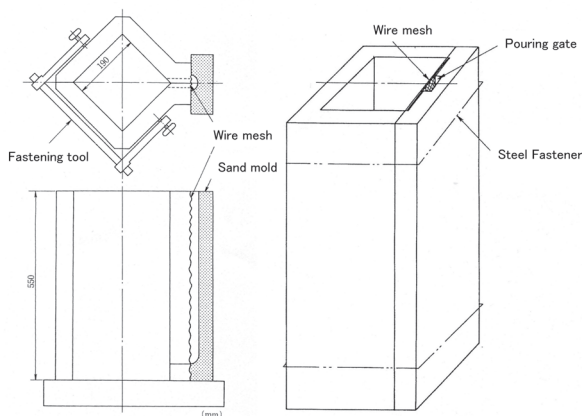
Molds of Dürener Metallwerke A.G. Method (Left) and Improved Method (Right)^{1, 2}
